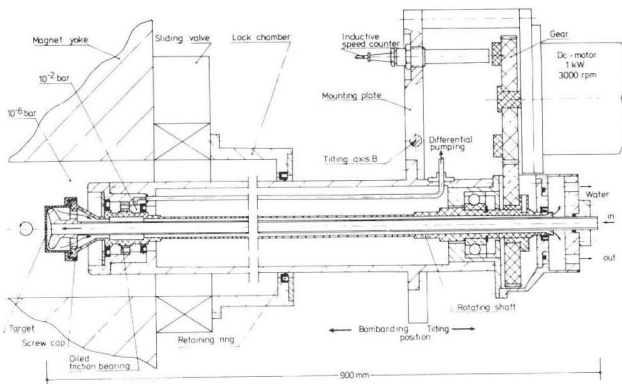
Schematic view of the rotating target. All crosshatched parts are rotating.
